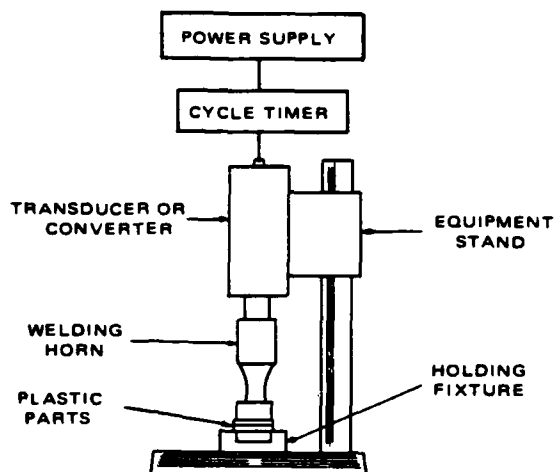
Basic Equipment Requirements for Ultrasonic Welding
